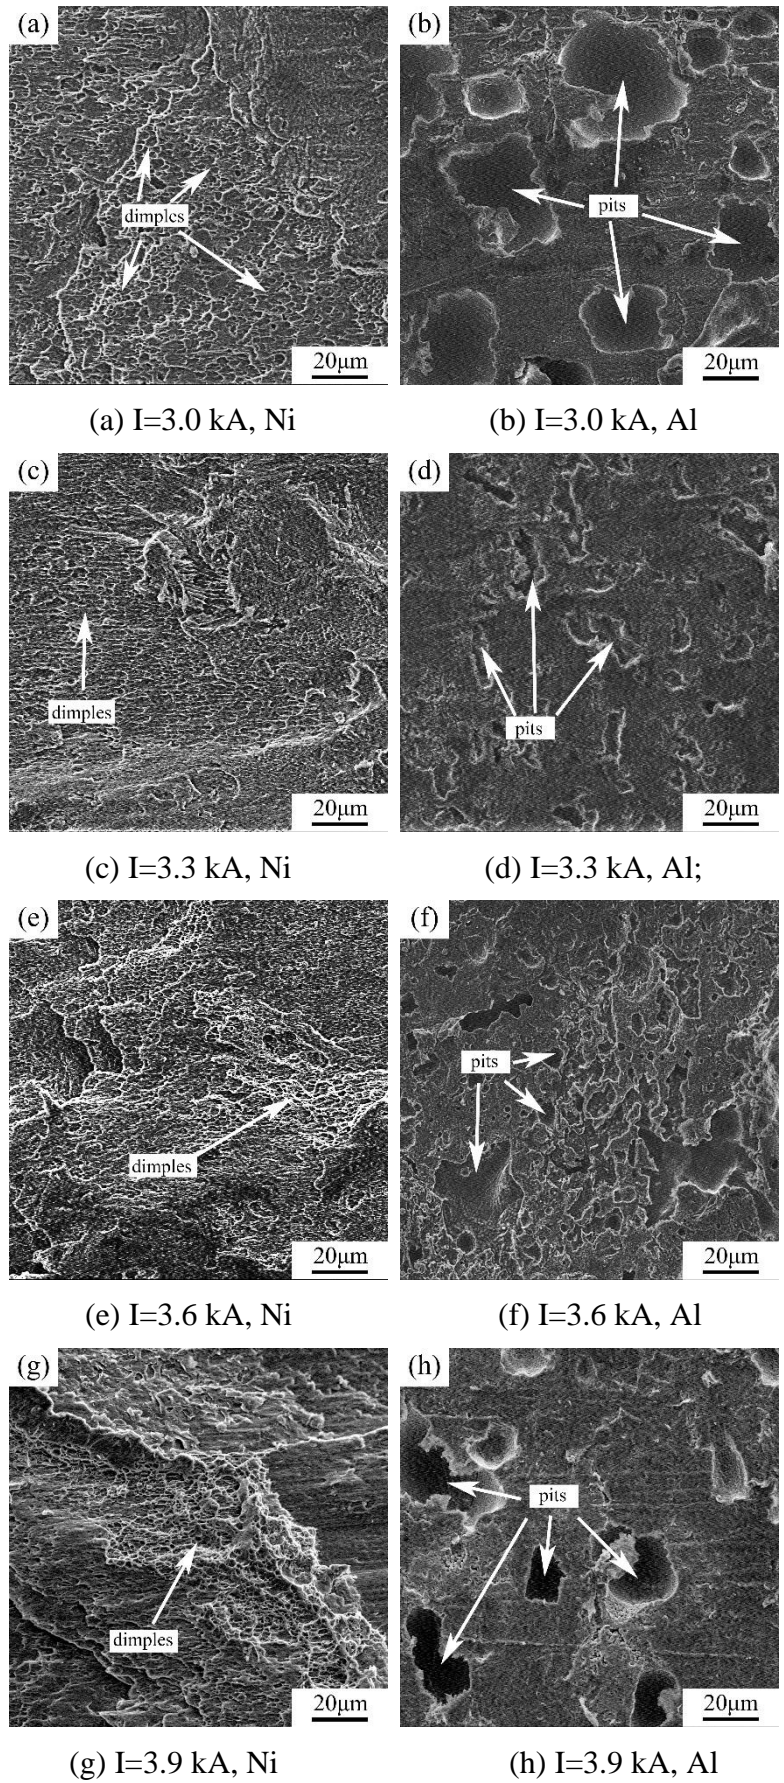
Microscopic morphologies of fractured solder joint surface
